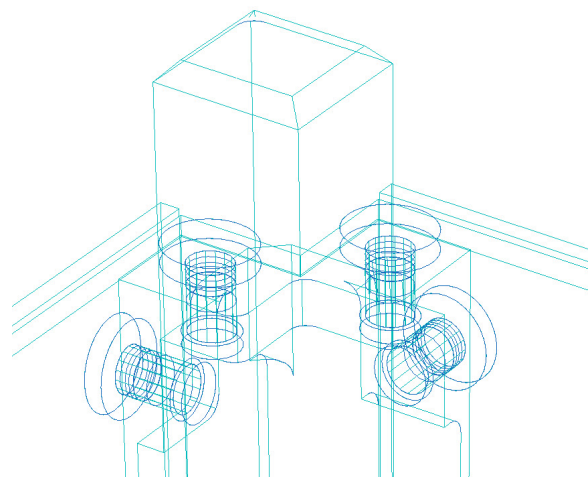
Wireframe view* of the bolts that fasten the panels to the aluminium support rail.
